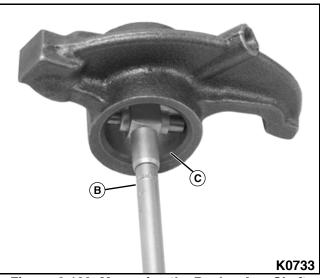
Measuring the Rocker Arm Shaft Bore
